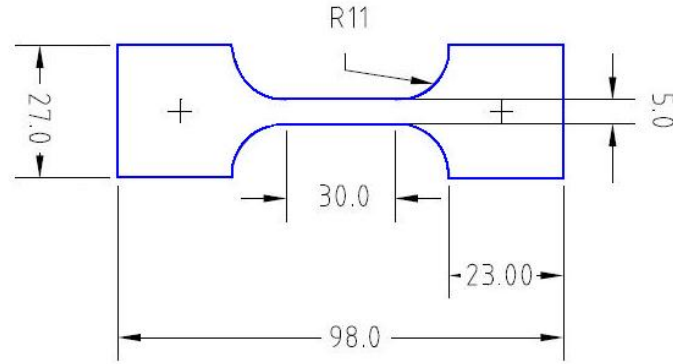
Tensile test specimen (Dimensions in millimeters)
